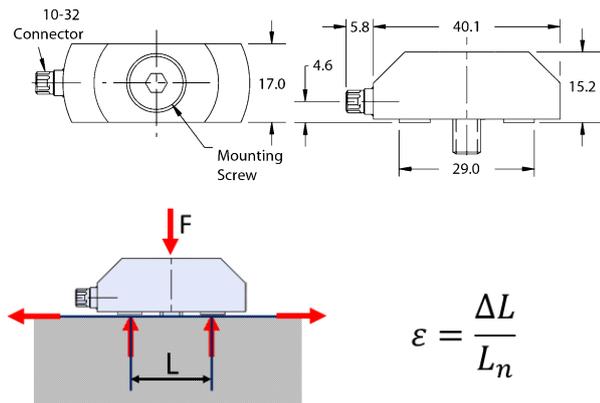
The dimension of the PCB ICP sensor used - M240A03 model [11]
